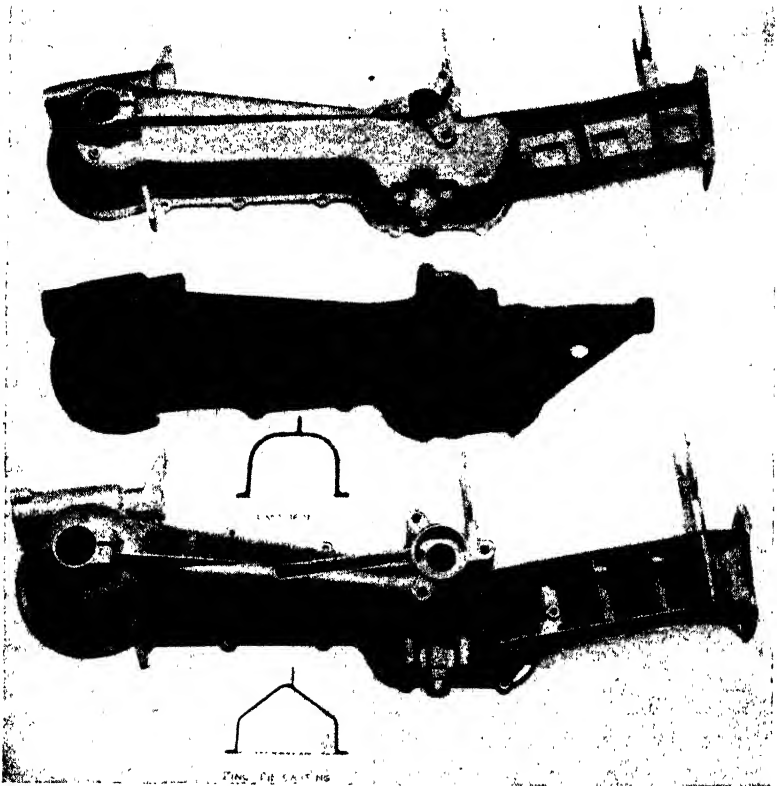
Die-cast and sand-cast washing-machine gear housings. The forms produced in a die have been manufactured in large quantities and used in preference to the sand-cast type, largely because of savings in machine work and because sand casting did not include some parts included in the die casting.
